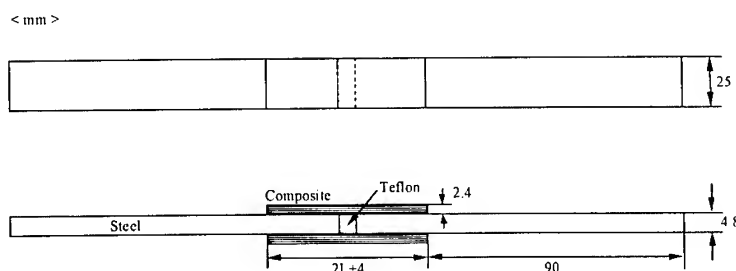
Dimension and shape of the co-cured double lap joint specimen
